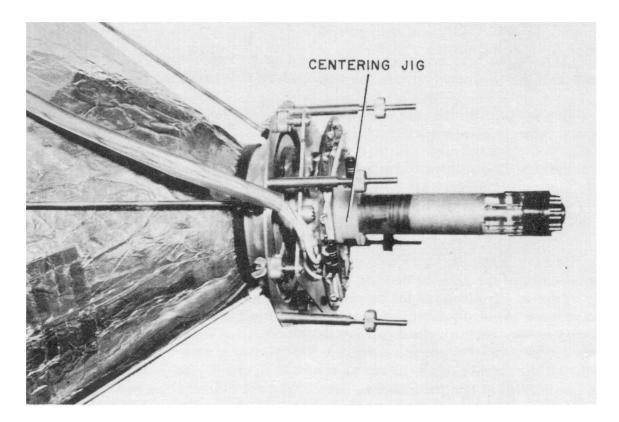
Partial Assembly Using Model 1285ES Support, Showing Centering Jig in Place
